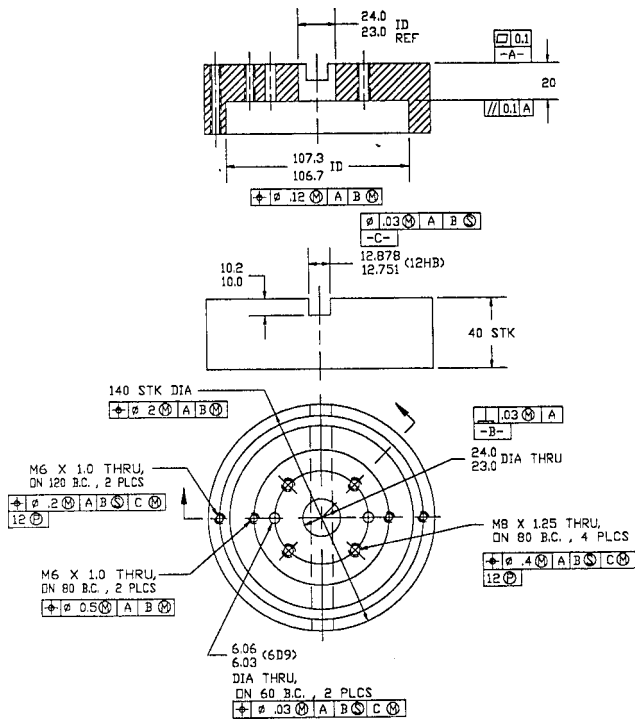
The Outer Shell of the Compression Fixture in Metric Units
